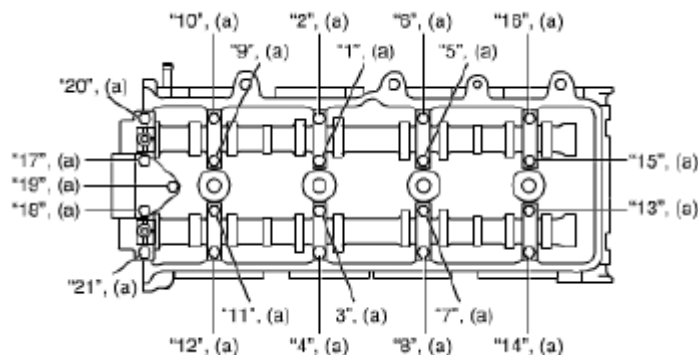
Identifying Tightening Sequence Of Camshaft Housing Bolt
